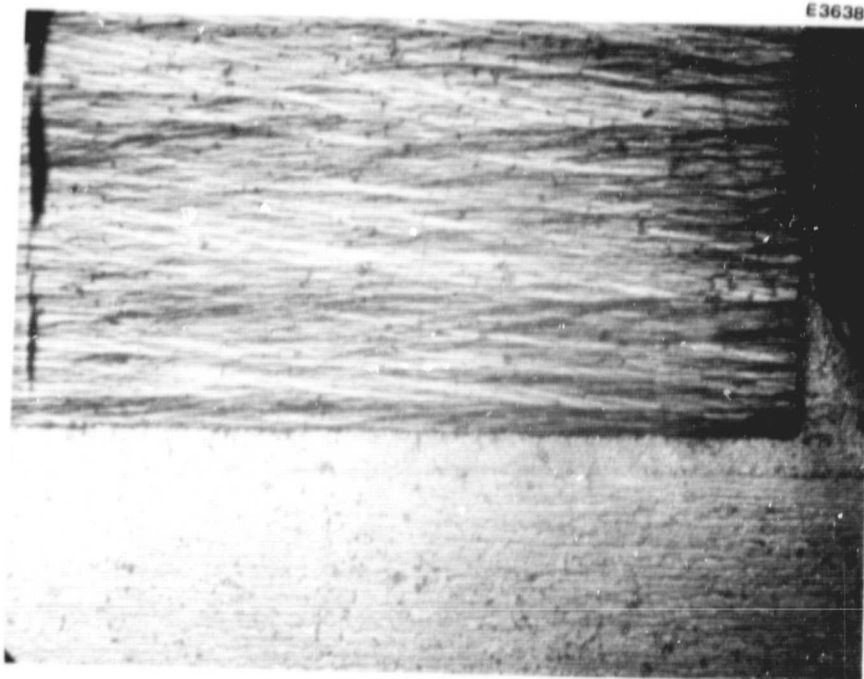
Enlarged view of the left side of the joint shown in Figure 2.6-9 and illustrating a complete, sound joint. 80X MAG.
